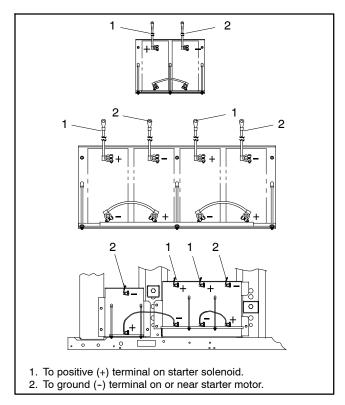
24-Volt Engine Electrical System Single Starter Motor Typical Battery Connection
